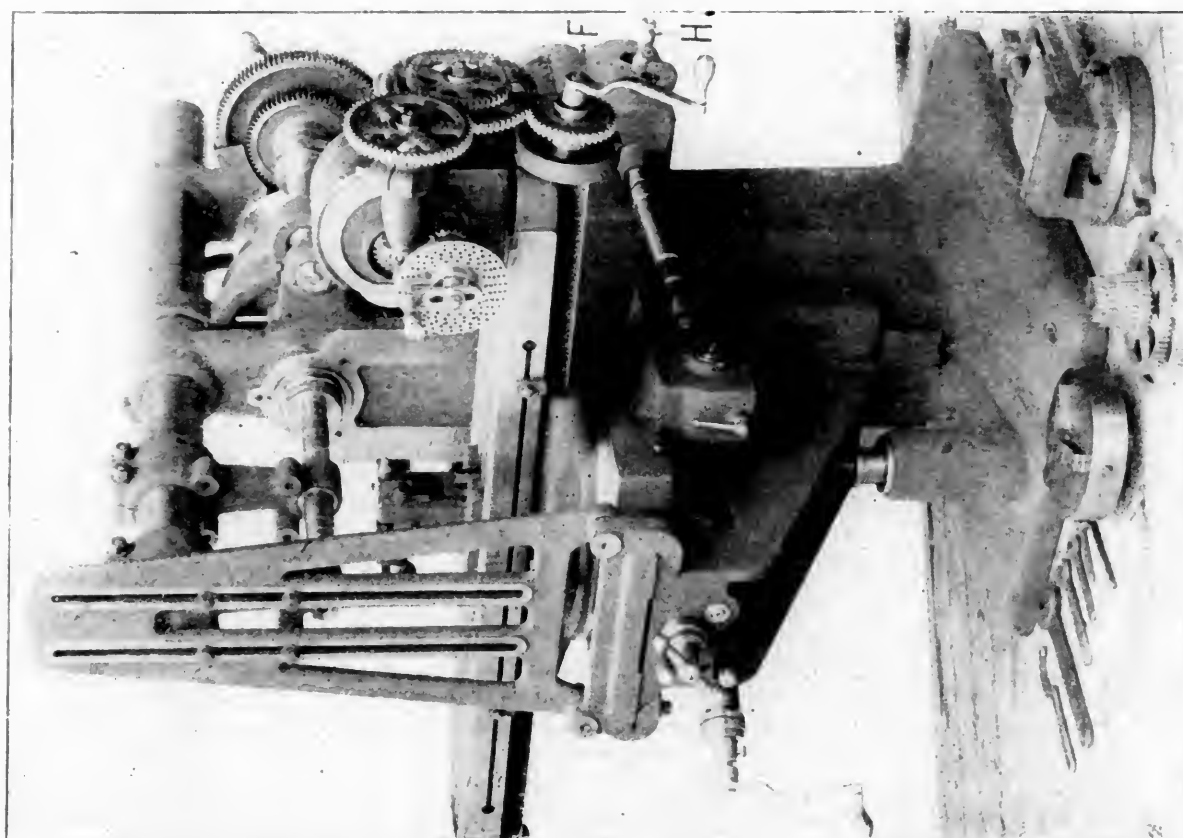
GENERAL VIEW OF THE NEW NO. 3 MILLING MACHINE.
